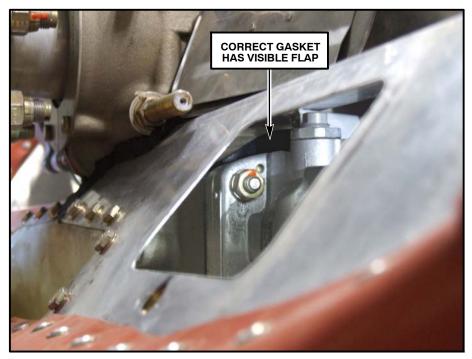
VERIFY CORRECT GASKET IS INSTALLED THROUGH INSPECTION HOLE
